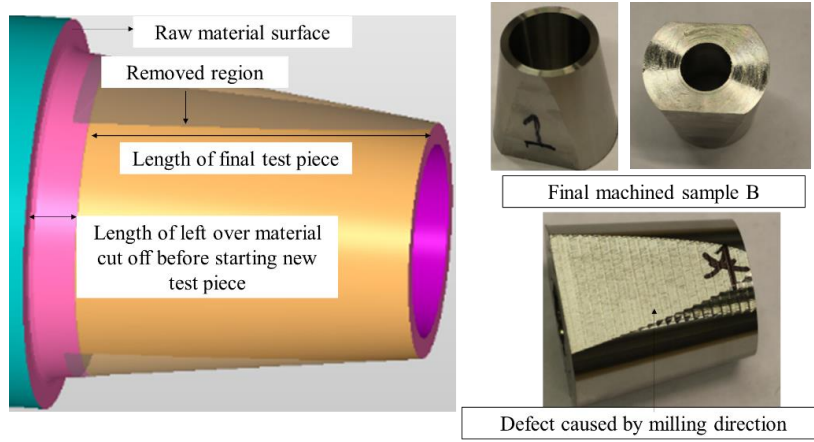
Illustration of the raw material, final parts and effect of possible machining defects.
